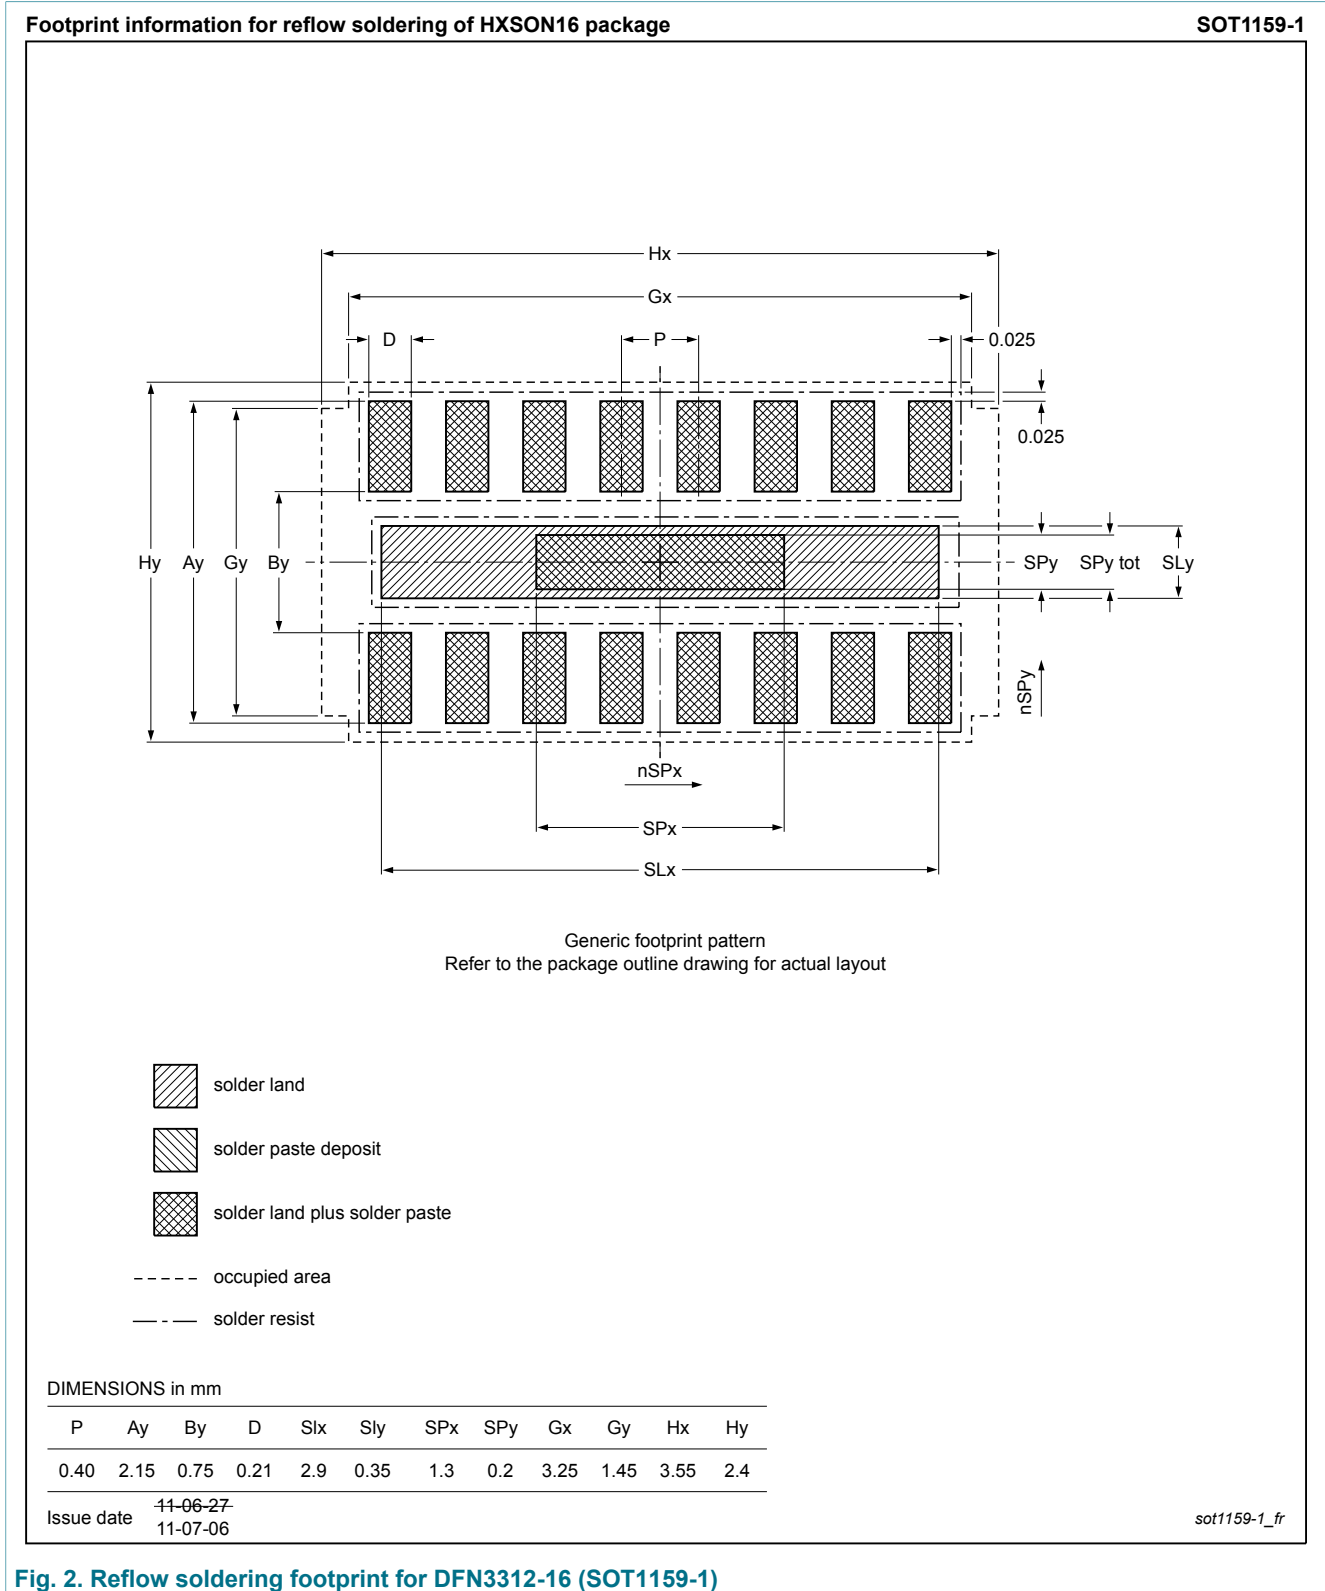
Reflow soldering footprint for DFN3312-16 (SOT1159-1)
